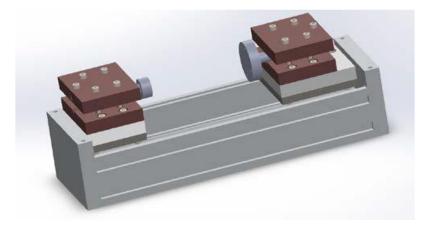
SolidWorks conceptual drawing of the mechatronics testbed.
